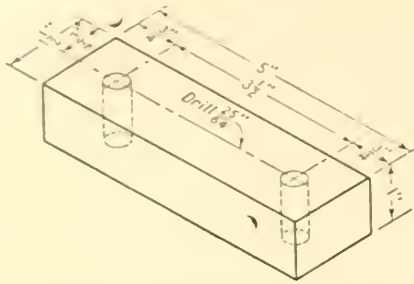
Extension block for upper rear throat-spring bracket, Massey-Harris corn binder
